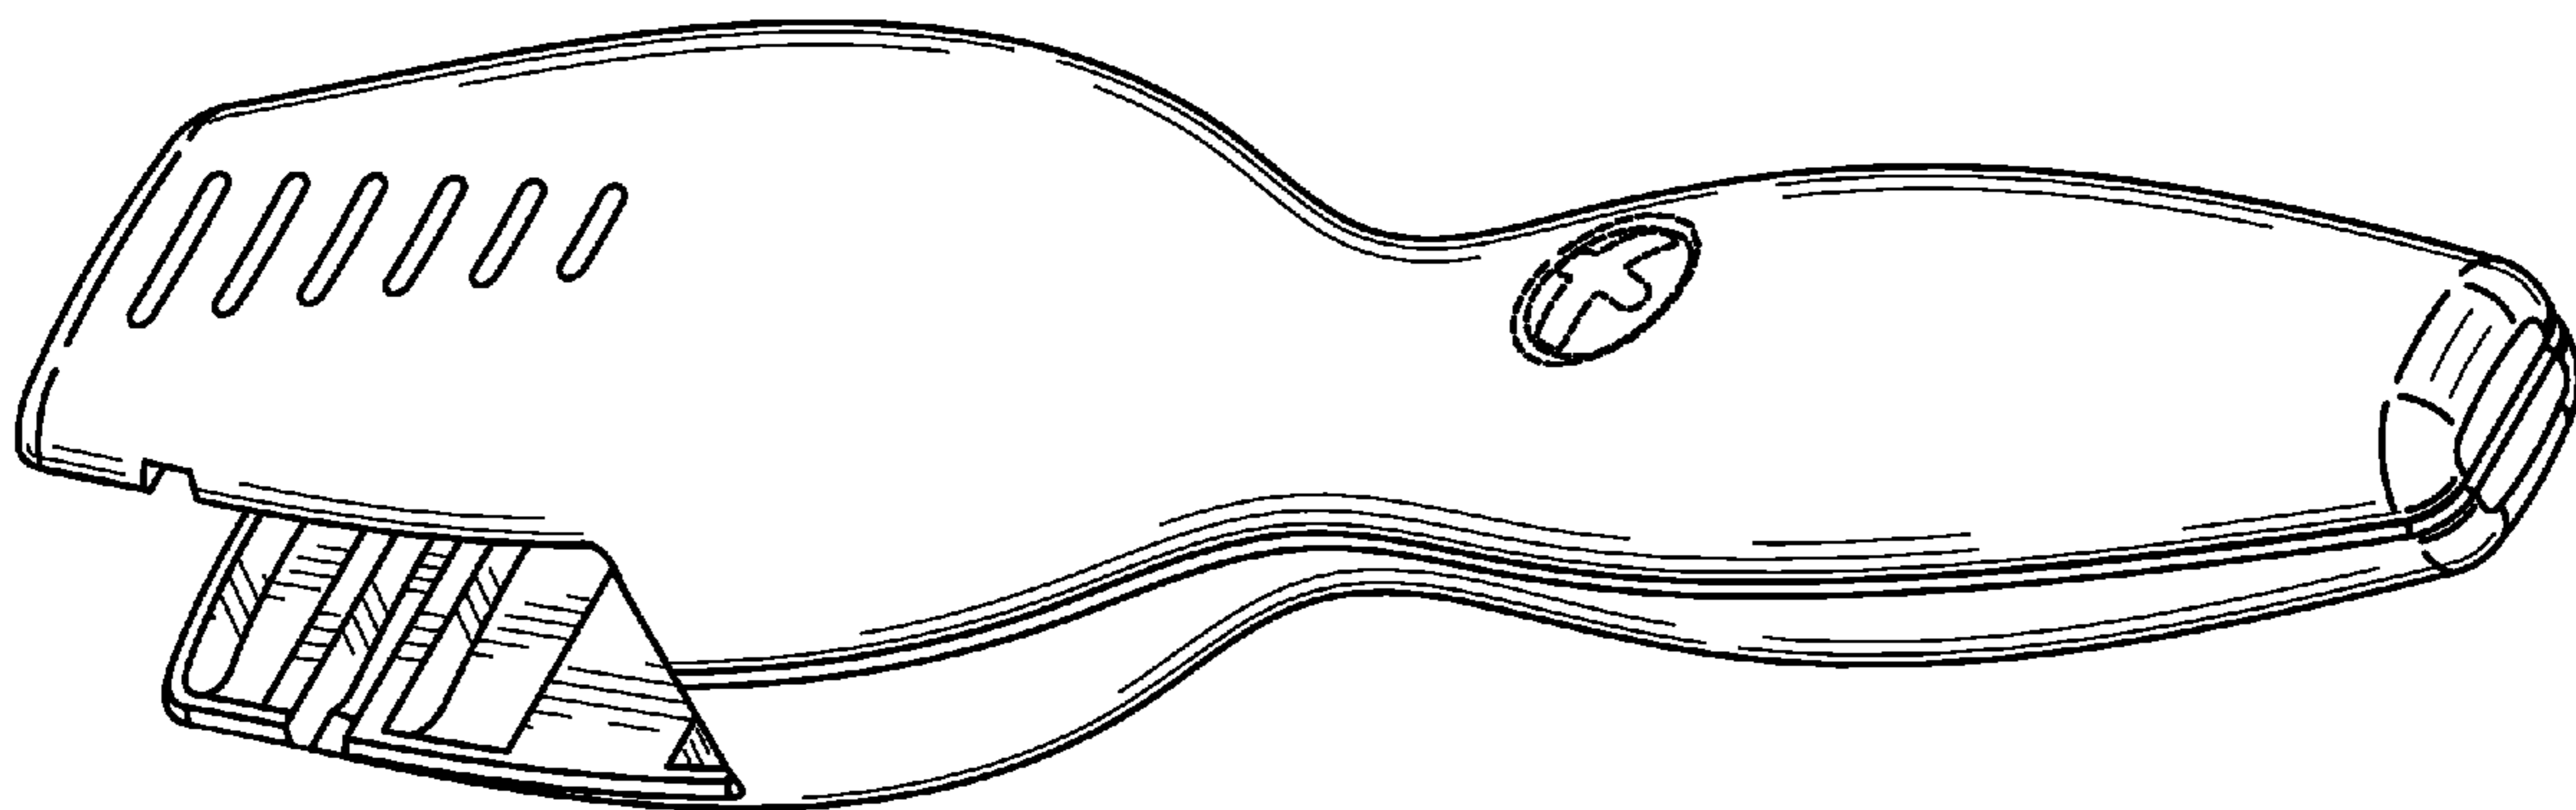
is a top-rear-right perspective view of the tool handle; the top-rear-left perspective view being a mirror image thereof;
